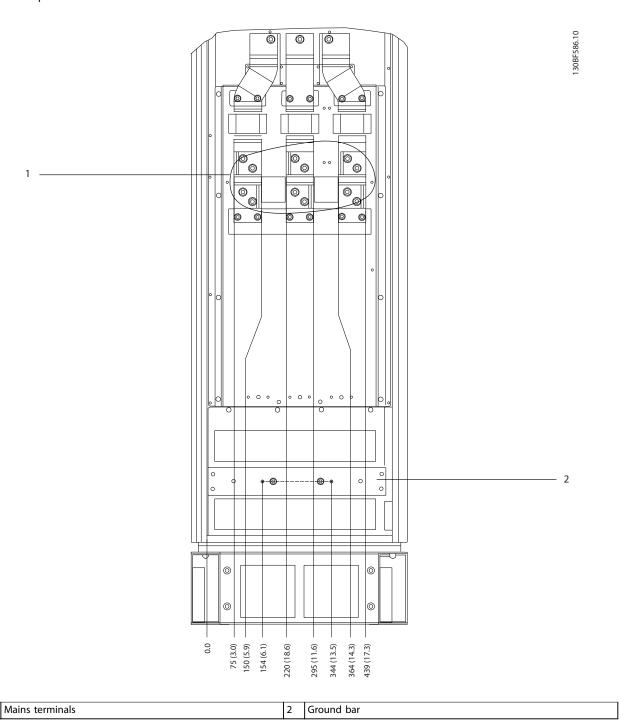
Terminal Dimensions for F3-F4 Options Cabinet, Front View
